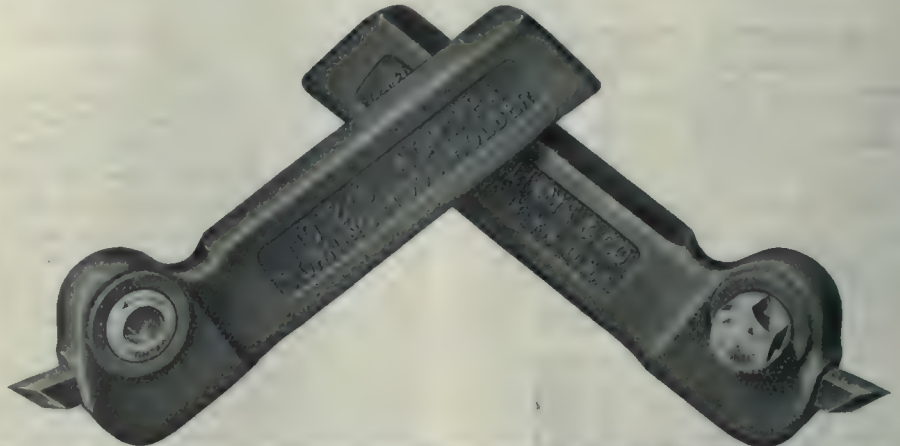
TURNING TOOL HOLDERS WITH STRAIGHT SHANKS, SHOWING THE TWO TYPES OF CAMS.
